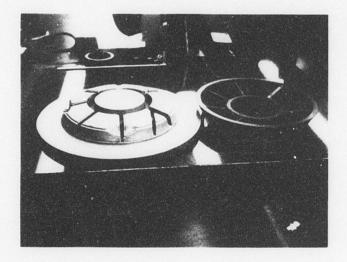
Cured Bearing Support Base Plate and Glass/Epoxy Tool.
